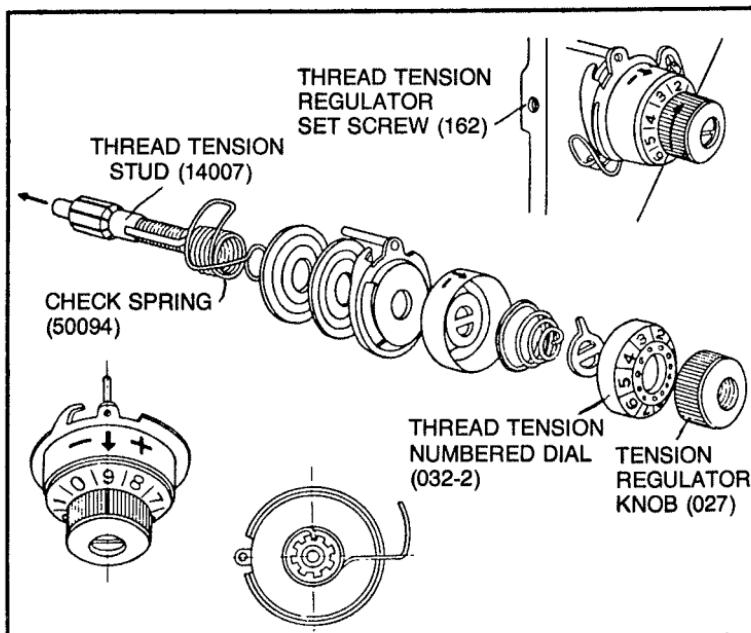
The upper thread tension regulator is disassembled on the New Home Model 532 in this figure as well as in Fig. 6-48. The tension of the thread check spring is set by inserting the end of the spring in the appropriate groove of the stud. This position may have to be determined by experimentation.
